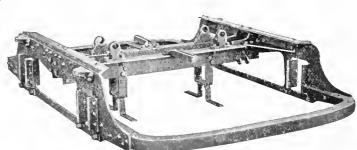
Steel Plate Truck Frames for Type "S" American Locomotive Co.
